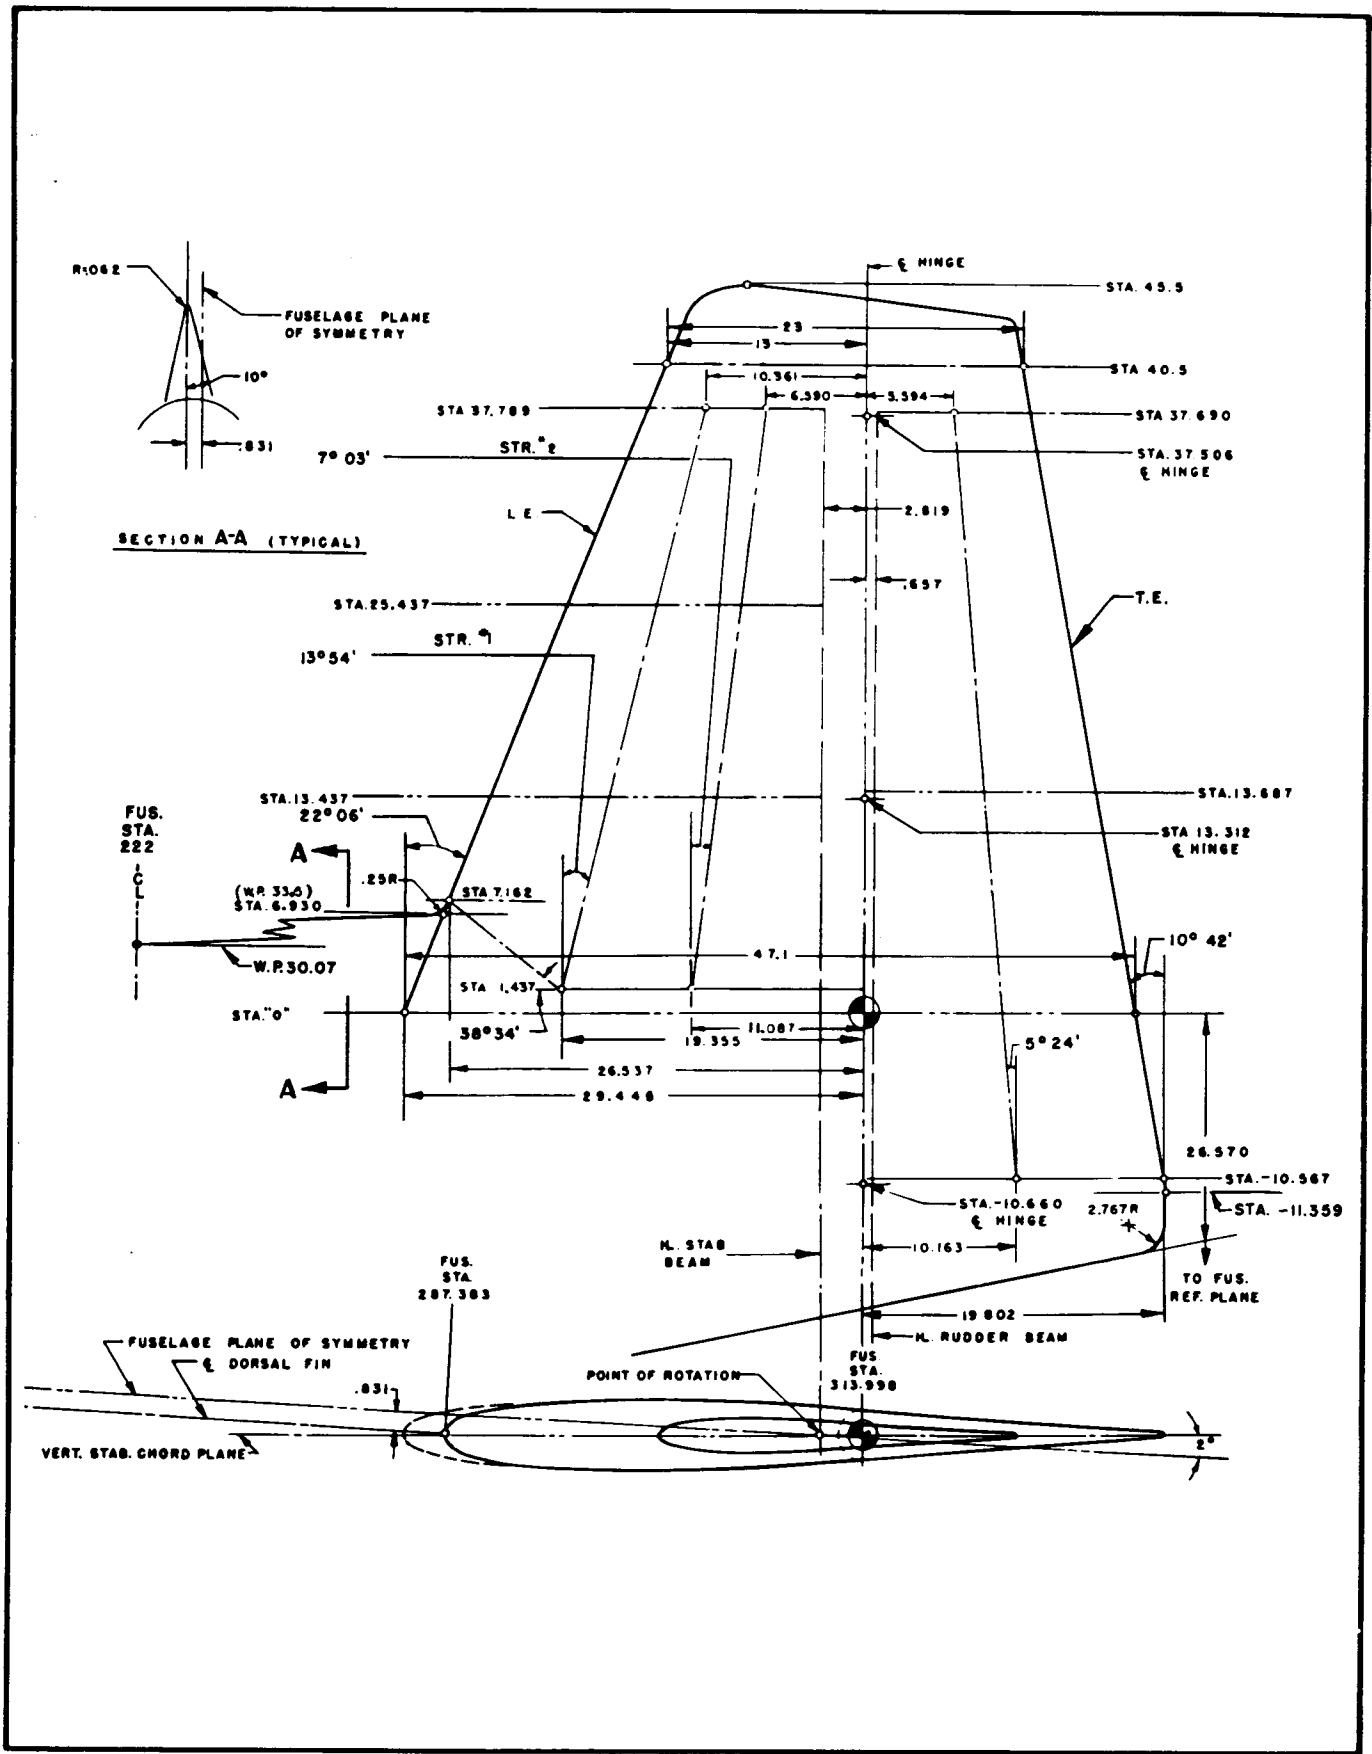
VERTICAL TAIL JIG DIMENSIONS
